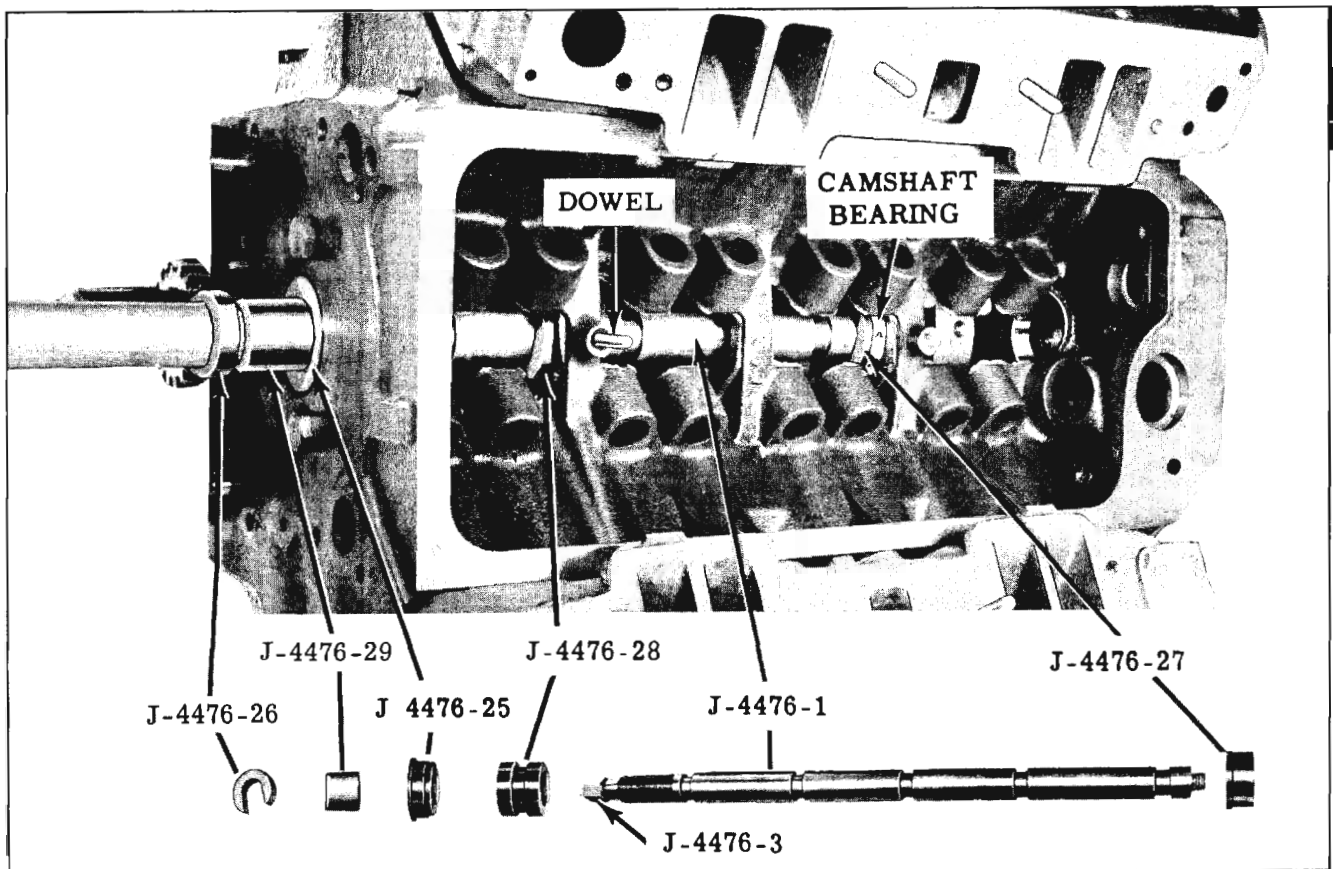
Installing No. 4 Camshaft Bearing (Typical of 3 and 2)
